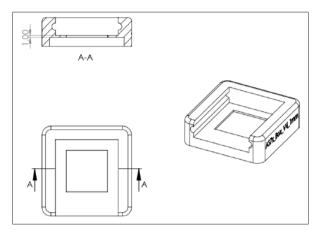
Prototype 1 Design Adapted to the Minimum Height
